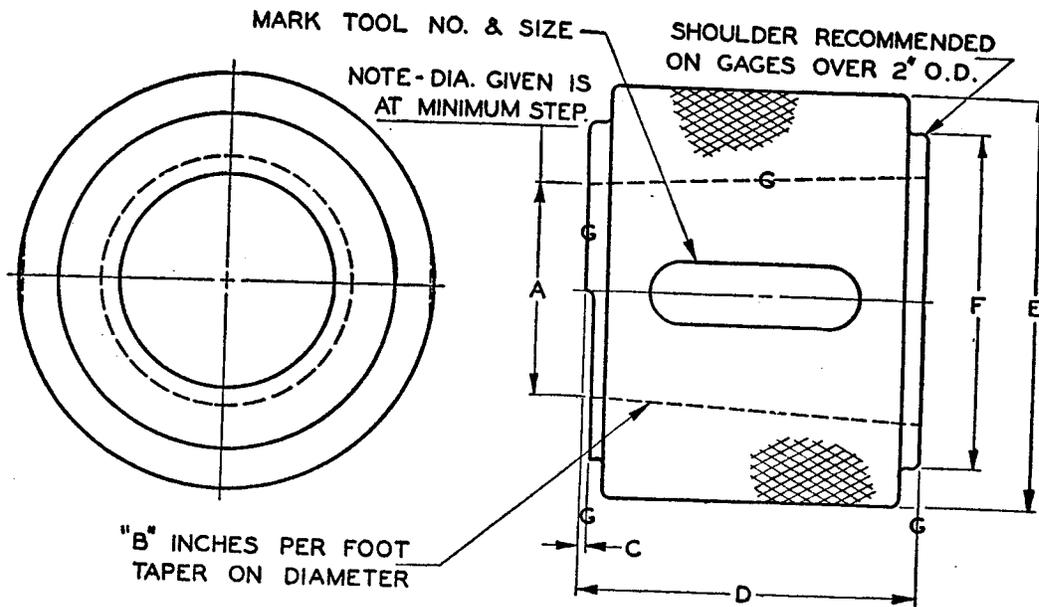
Recommended design of taper ring gage for special applications and method of dimensioning.
